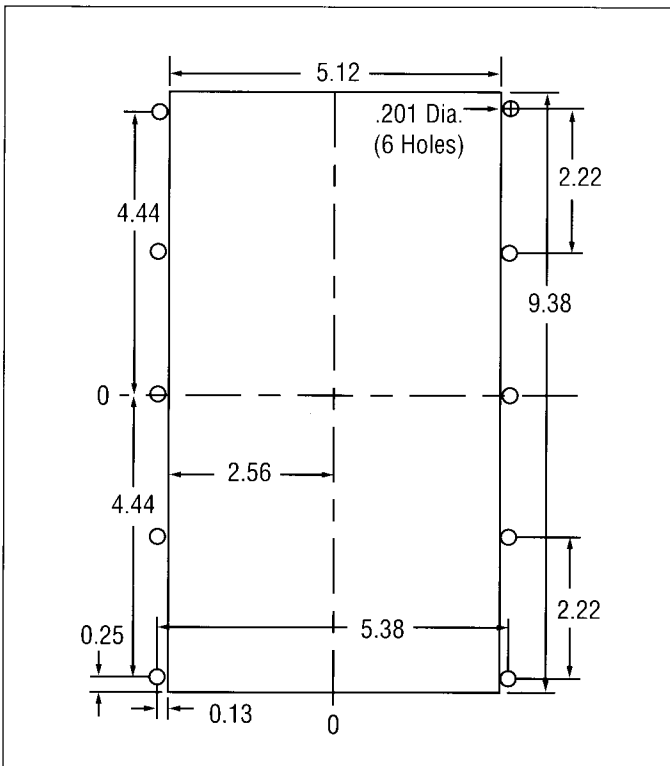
Cutout Dimensions and Drilling Pattern (inches)
